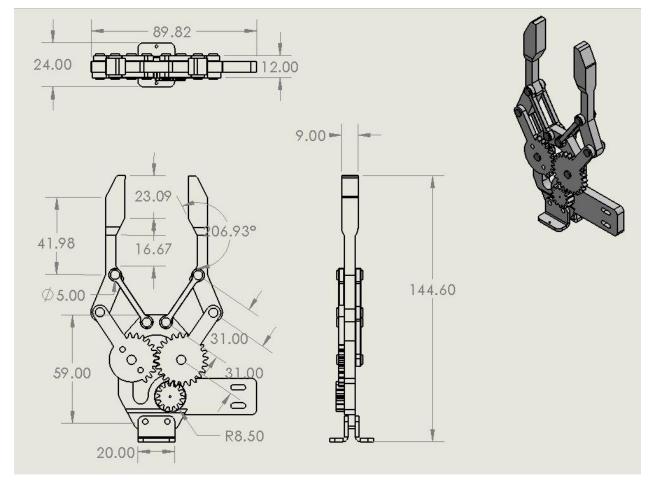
Technical Drawing of Gripper System (All dimentions are in mm)
